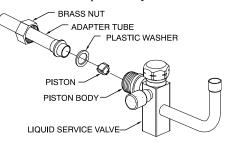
Liquid Service Valve with Heating Piston and Adapter Tube
